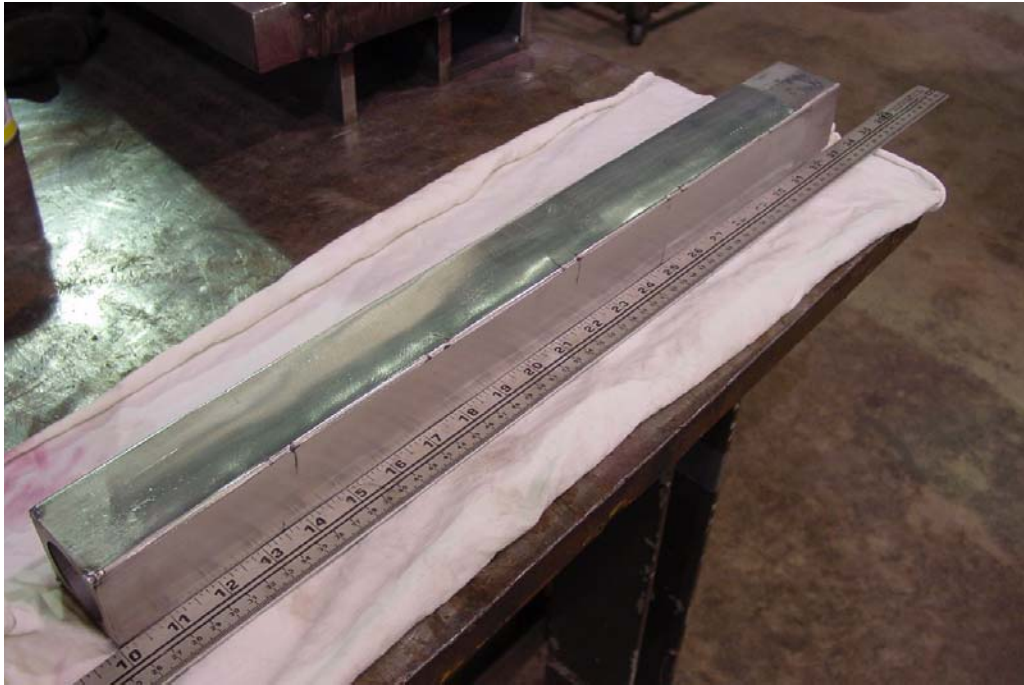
OD appearance of the jacket welds after surface grinding
